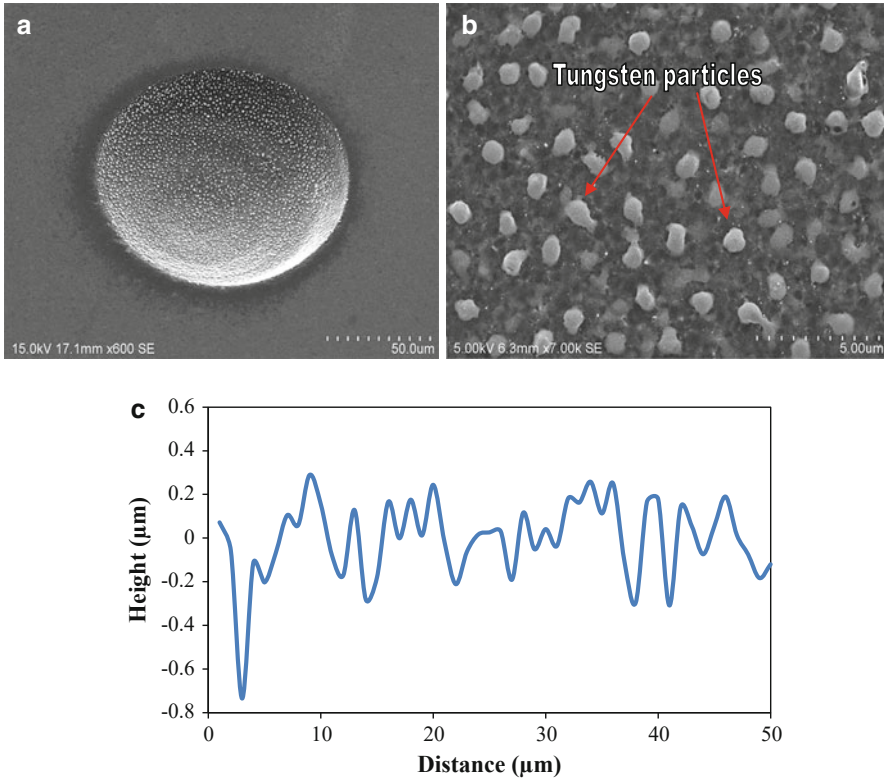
Machined micro dimple without ultrasonic cavitation: (a) a single dimple, (b) magnified view of dimple surface, and (c) surface roughness profile of dimple
